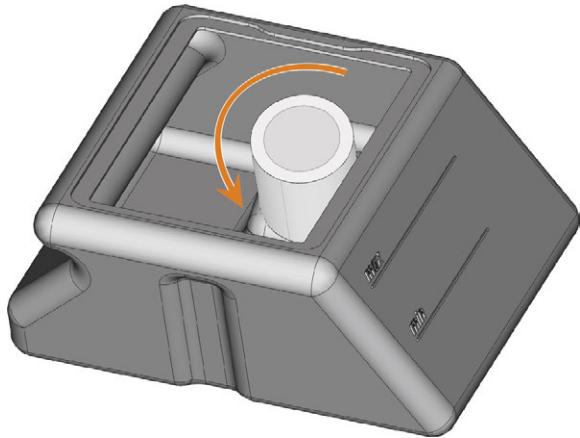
UNSCREWING THE COOLING LIQUID FILTER
